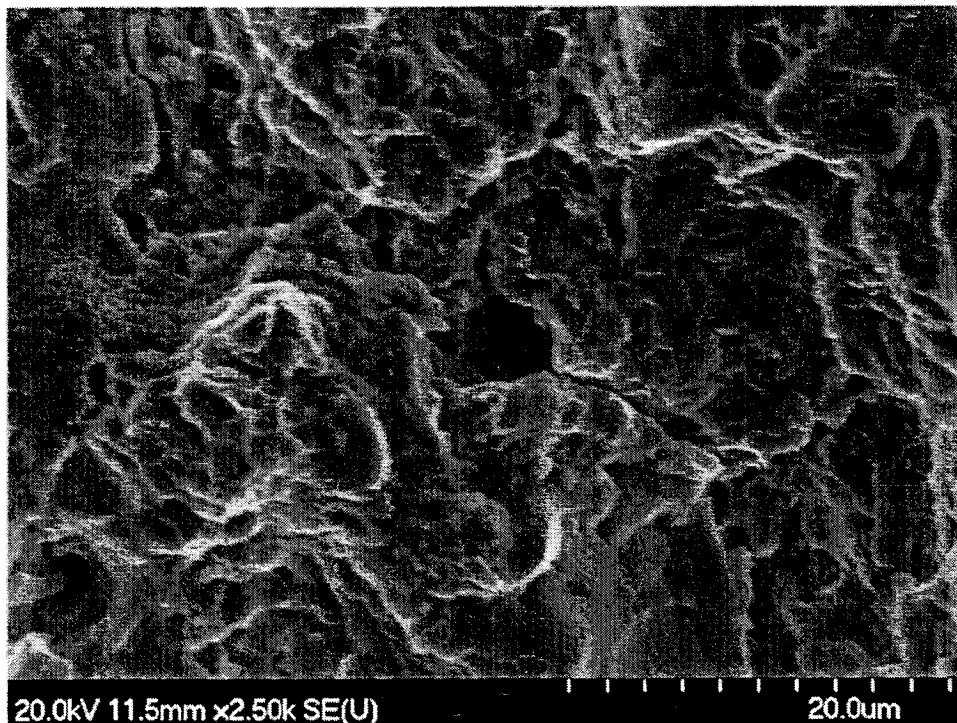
Higher magnification view of K region of the fatigue fracture surface of 4340 steel heat treated cryogenically
